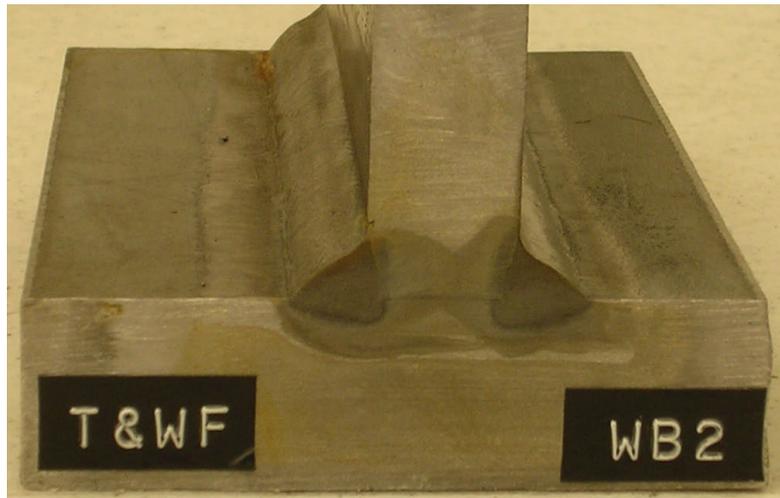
Etched cross-section of the GMAW welded tee section.
